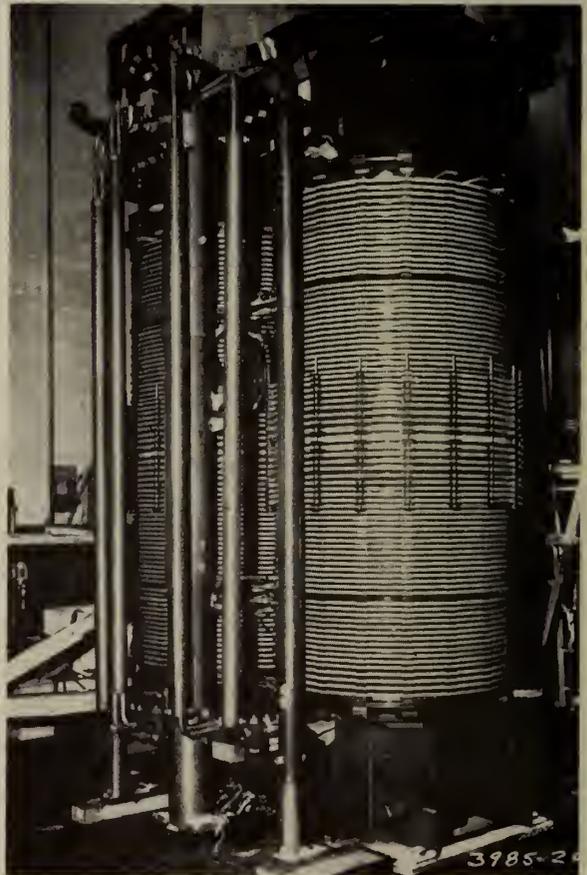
Showing high tension winding of the double disc construction. Type A transformer.
